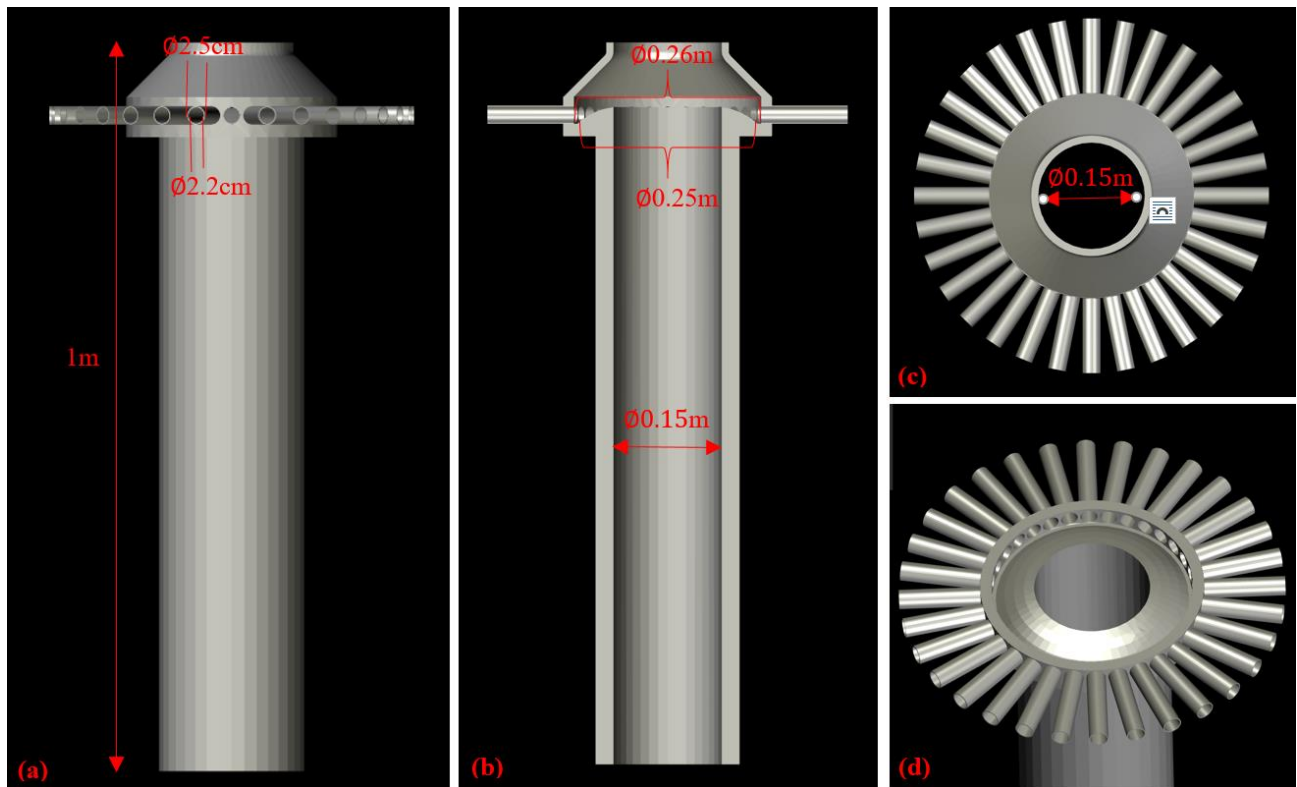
Flare dimensions and details; (a) side view of the flare, (b) cross-section view of the flare, (c) top view, (d) flare without the cone view.
